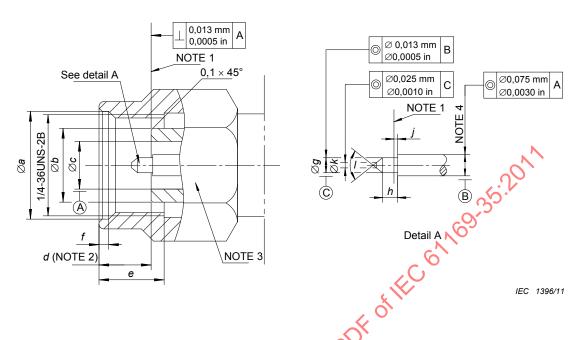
Connector with pin-centre contact (for dimensions and notes, see Table 4)
